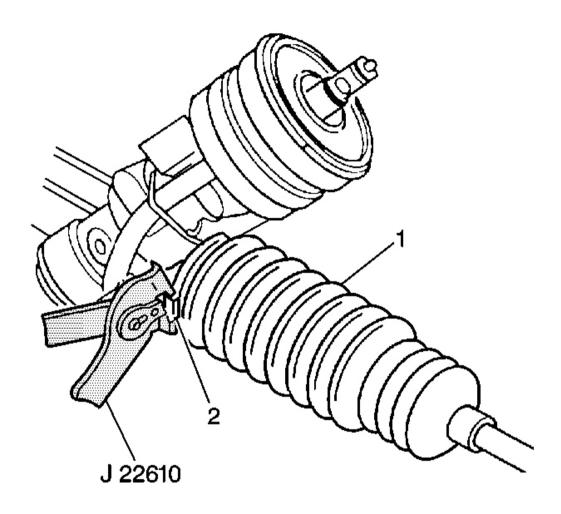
Boot Clamp & J 22610 Courtesy of GENERAL MOTORS CORP.
